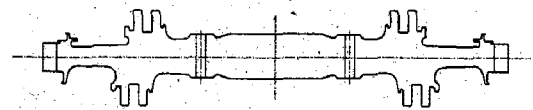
Finish machining shape of 2nd stage turbine disk for small size gas turbine
